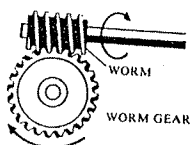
The worm gearing has a short revolving screw (the worm) whose teeth move into the special teeth of a helical gear (the worm gear).
